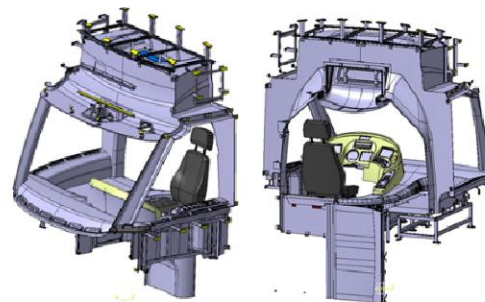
Three dimensional design of the front part of the Bimodal tram. Front view and rear view.
